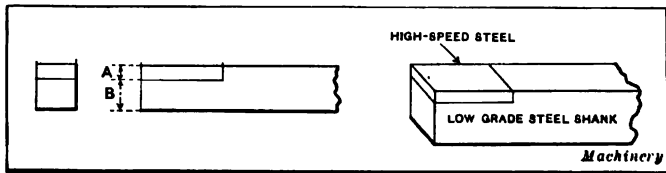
Fitting High-speed Steel Pieces to Low-carbon Steel Shanks
